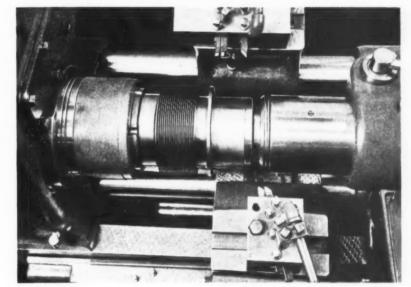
Set-up for the Final Operation on the Cylinder Barrel, which Consists of Finish-turning the End of the Cylinder Below the Flange, and Facing One Side of the Flange
